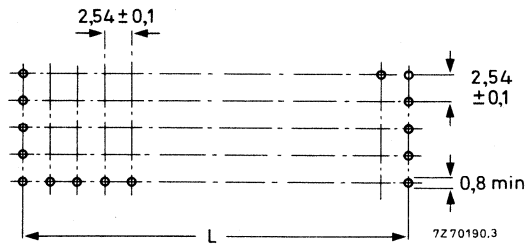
Hole pattern for double-row panel sockets. See Table 2, pages 10 and 11 for dimension L.
